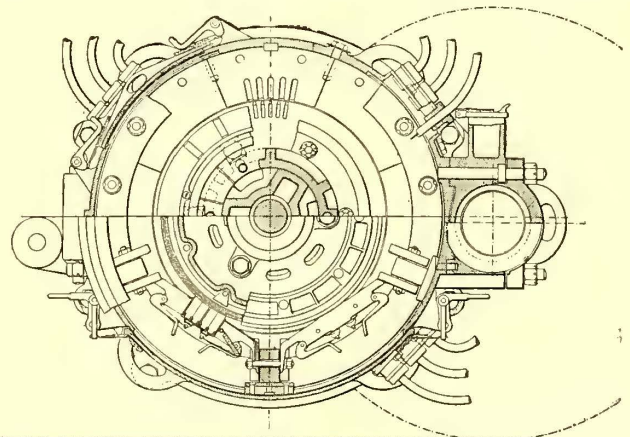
SECTIONAL ELEVATION OF MOTOR
